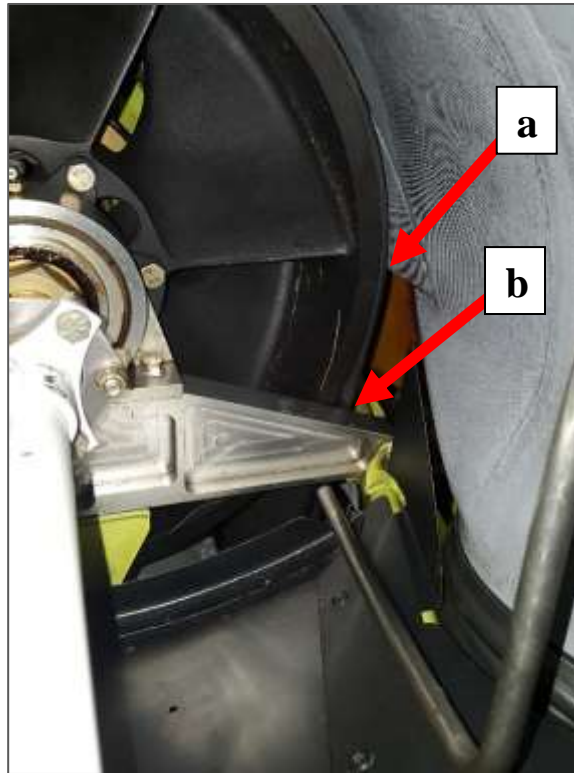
Inspection points – a) Edge of upper plenum/air inlet, right side; b) Right truss
